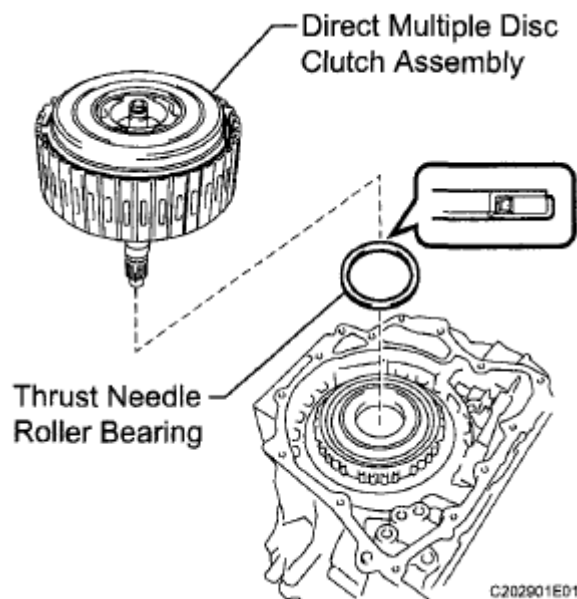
Identifying Direct Multiple Disc Clutch Assembly And Transaxle Case
